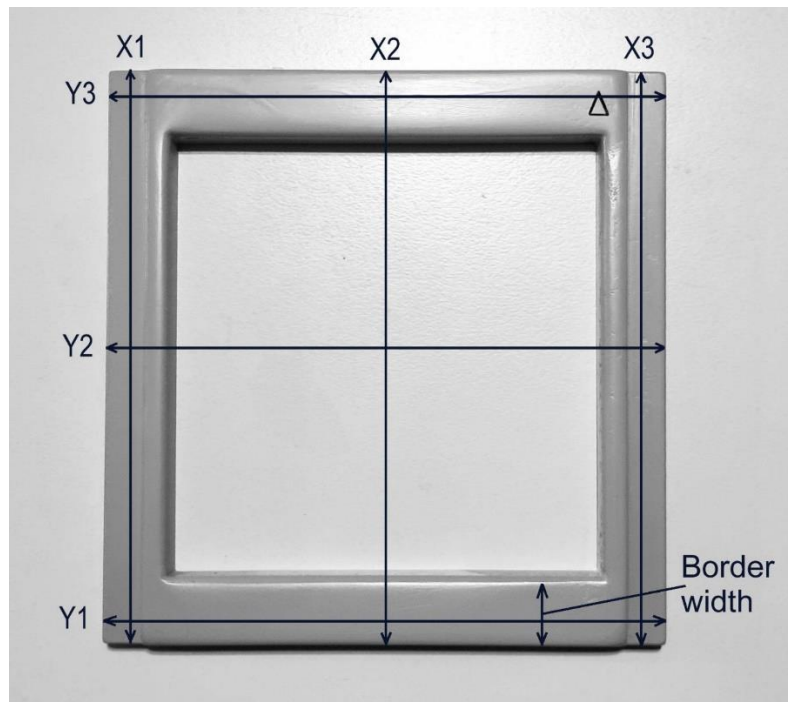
Cast end-frame showing positions of dimensional accuracy measurements
